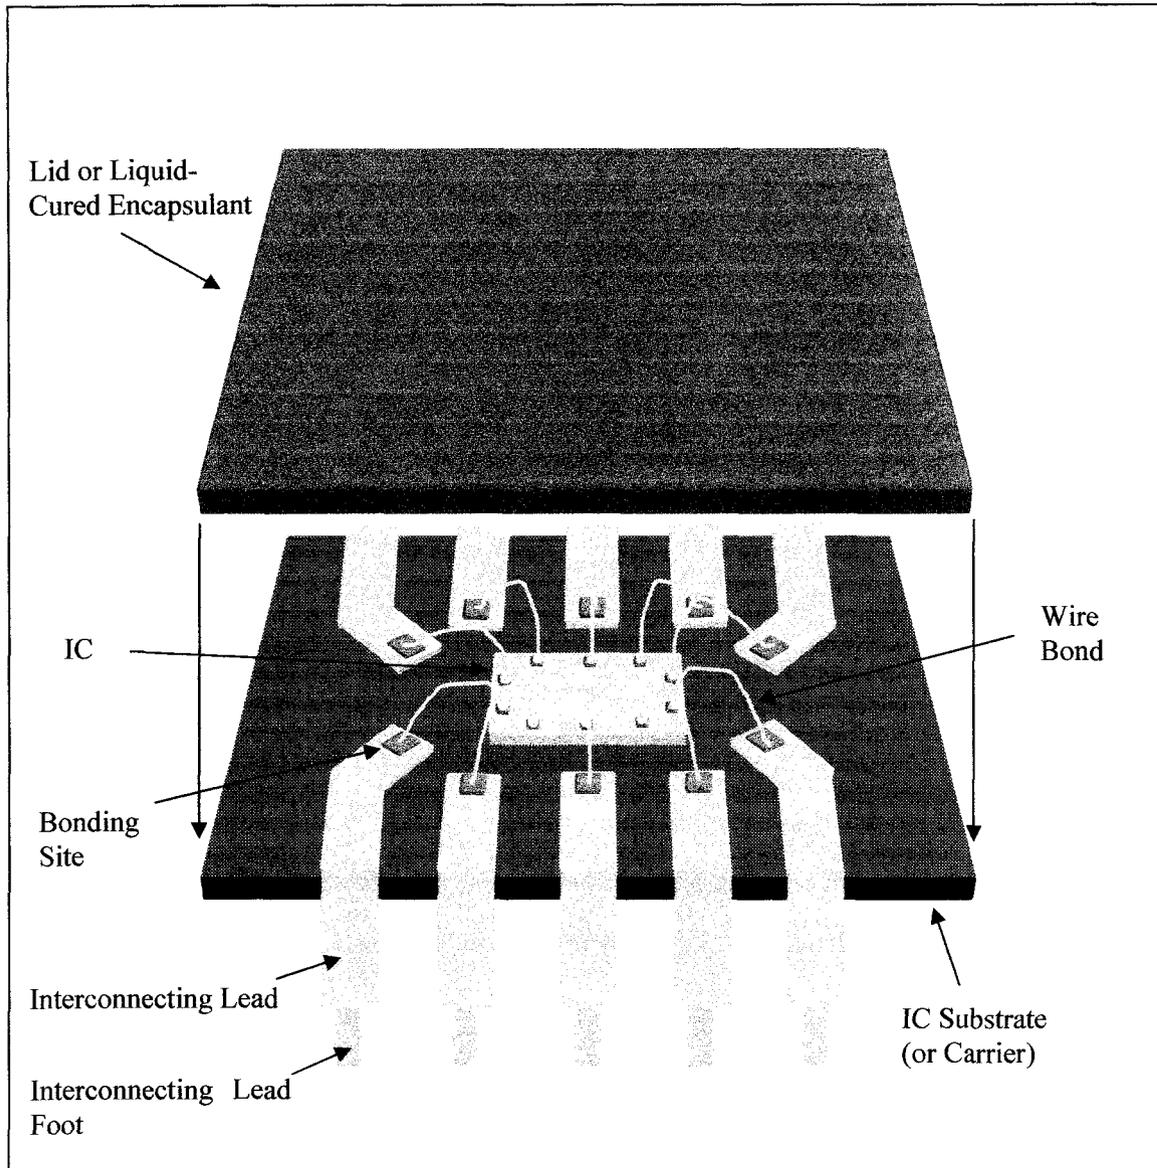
Cross-section of a wire-bonded chip mounted on a dual-in-line package, or DIP. This drawing is based on Figure 15.9 of Mayer and Lau 1990.
